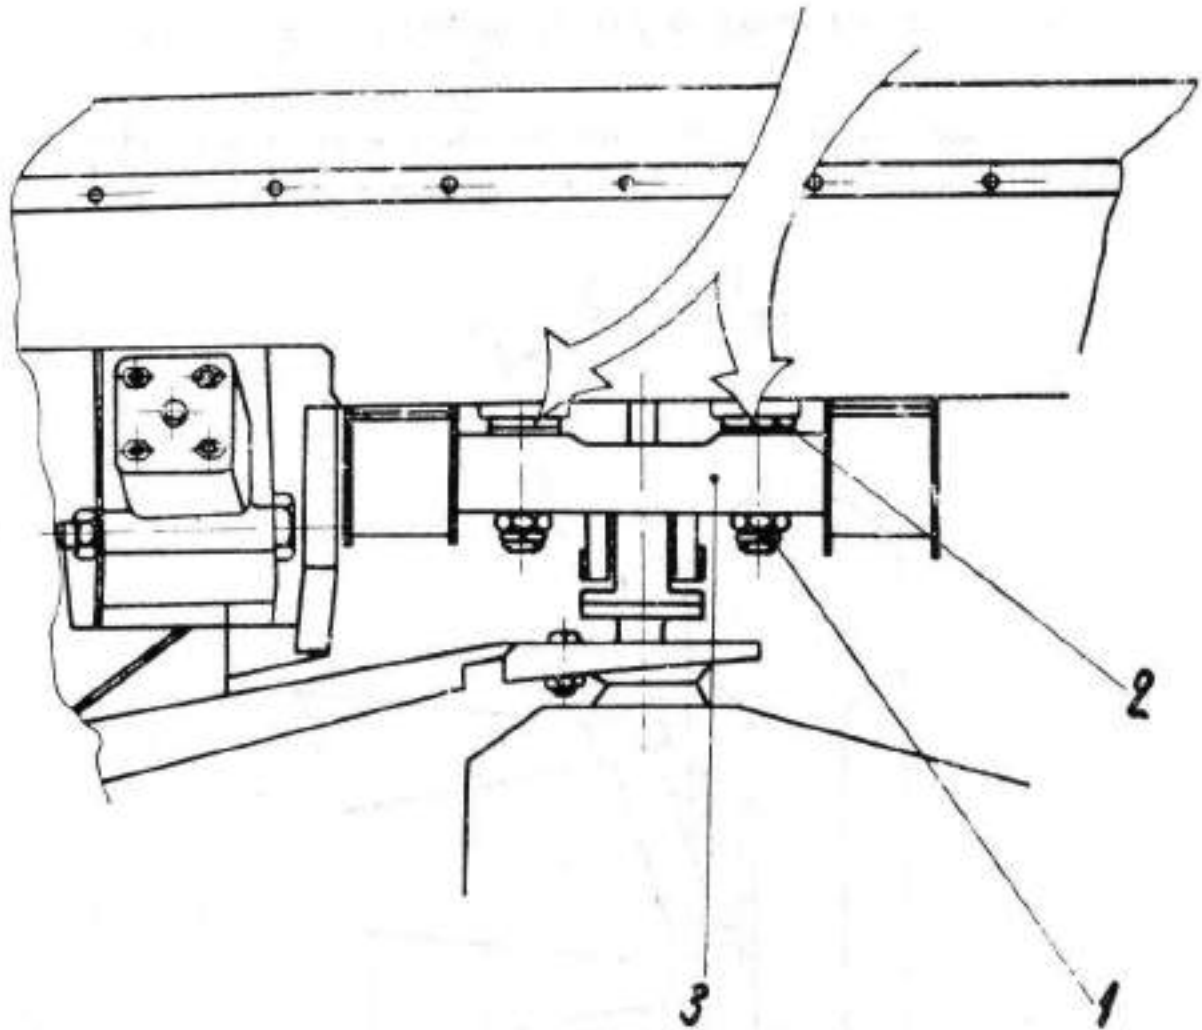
ADJUSTING CAMBER & CASTER ANGLE
